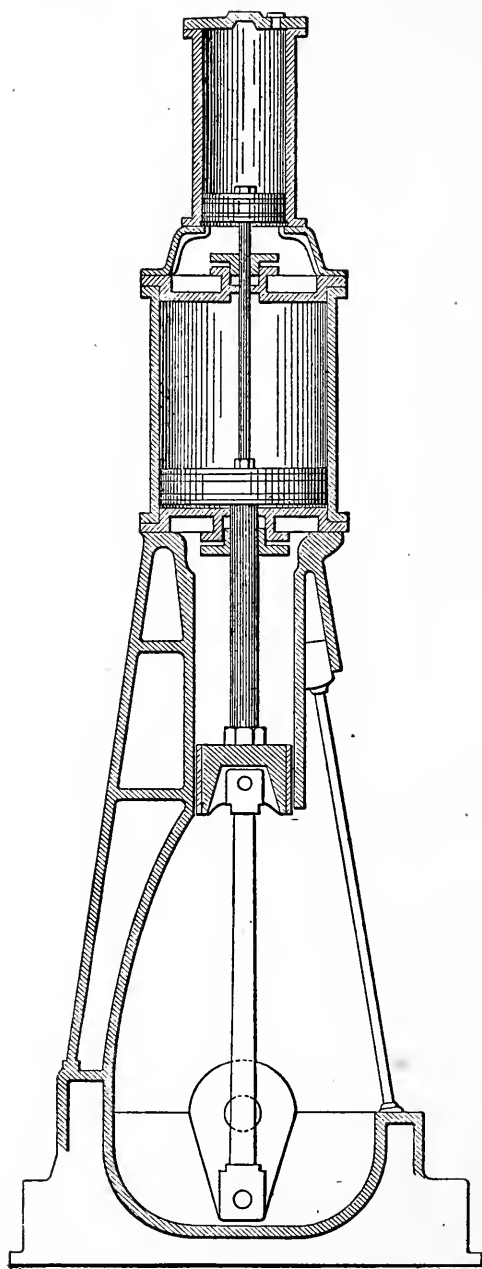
Cylinder Designed to Balance Moving Parts on Vertical Engine.
